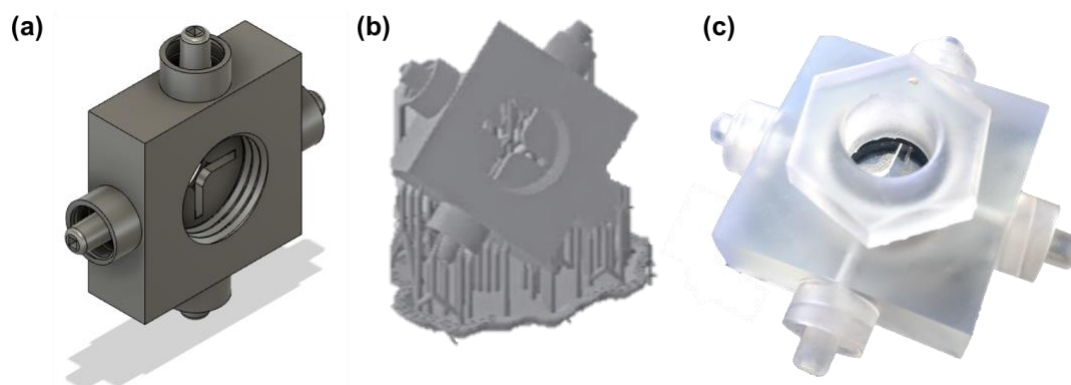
Representative images of the straight channel design during (a) the CAD process, (b) a computer rendering of the printing process, showing the supports during 3D printing and (c) a photograph of the final print device with the supports removed and the windows installed.
